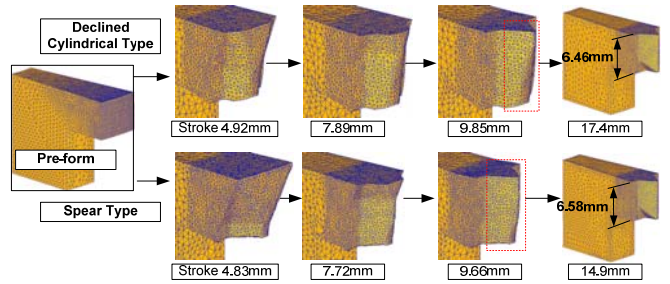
Filling in gear tooth of declined cylindrical type and spear type
